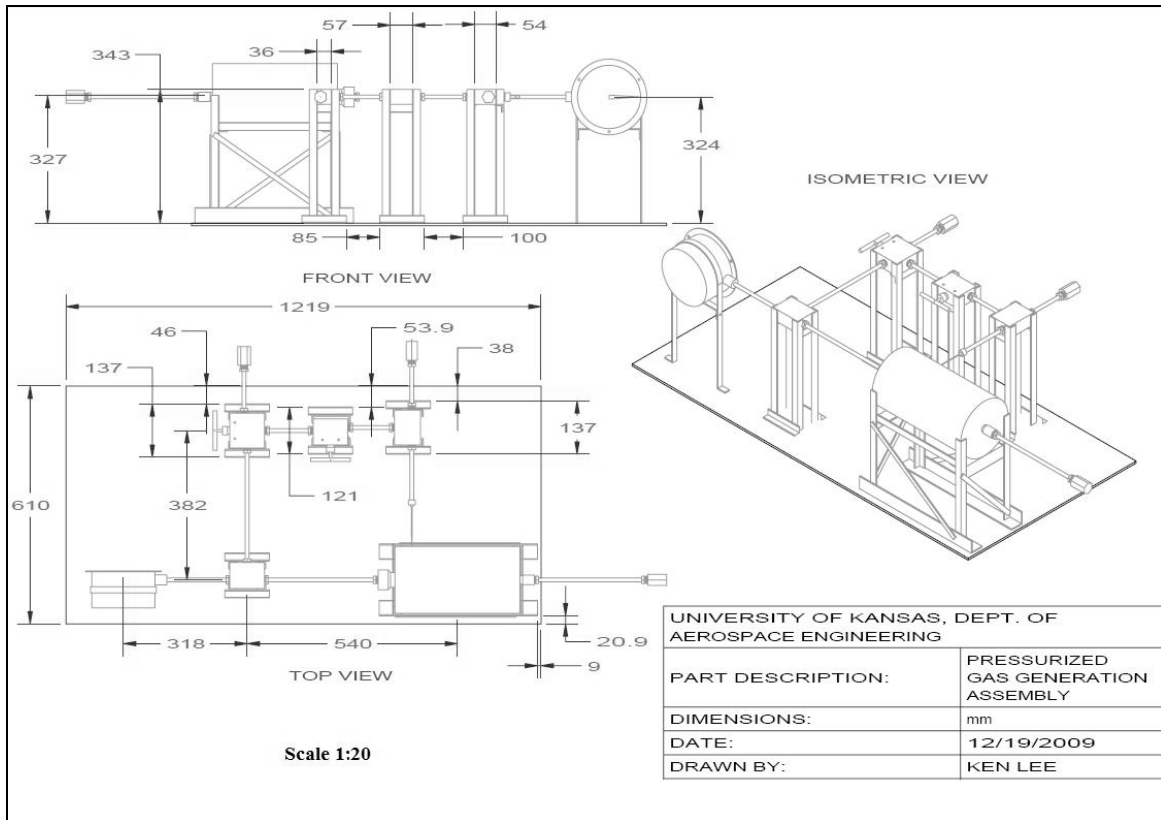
Front, Top and Isometric CAD Views of the Pressurized Gas Generation Assembly Drafted in UG NX 6.0.
